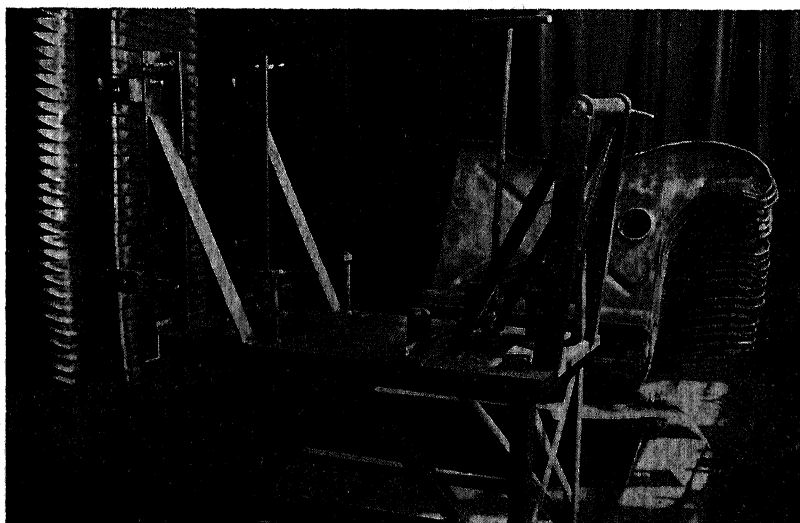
Assembly fixture for tack welding parts of pressing machine frame shown in Fig. 468.
